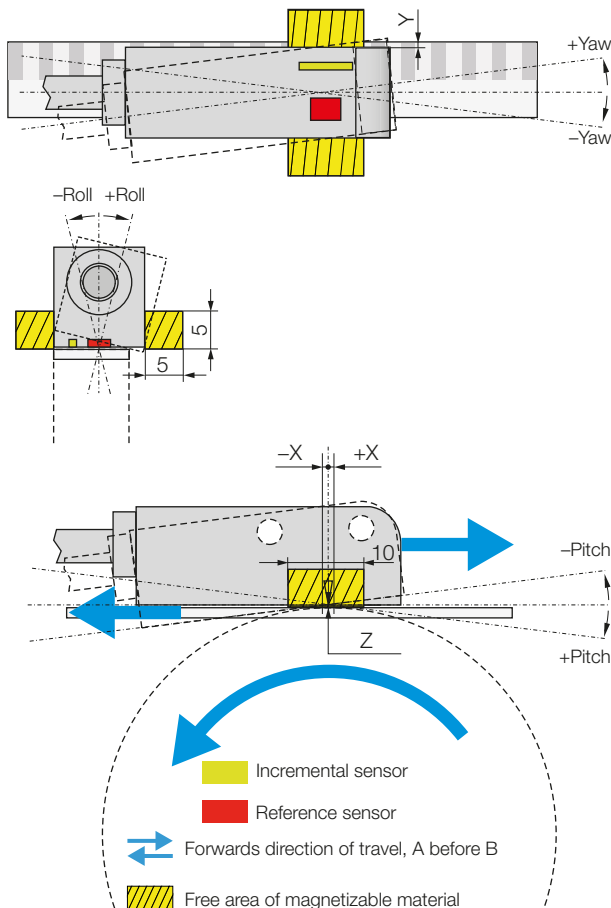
Distances and tolerances BML-S1F1...
